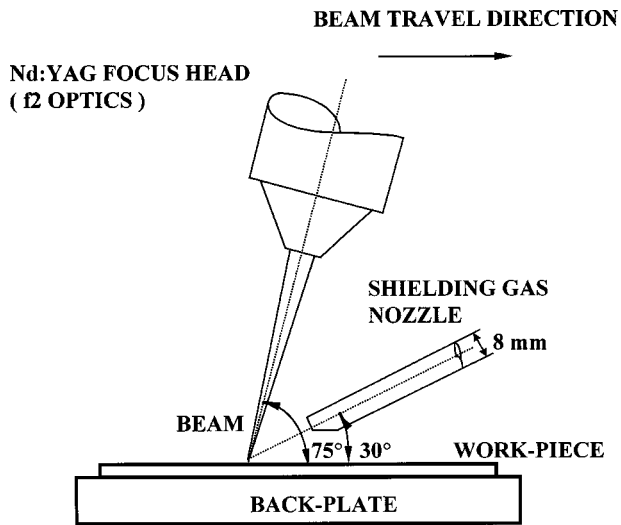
Nd:YAG laser welding arrangement.
